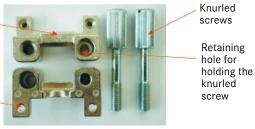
Screw adapter with retaining screw (top section)
